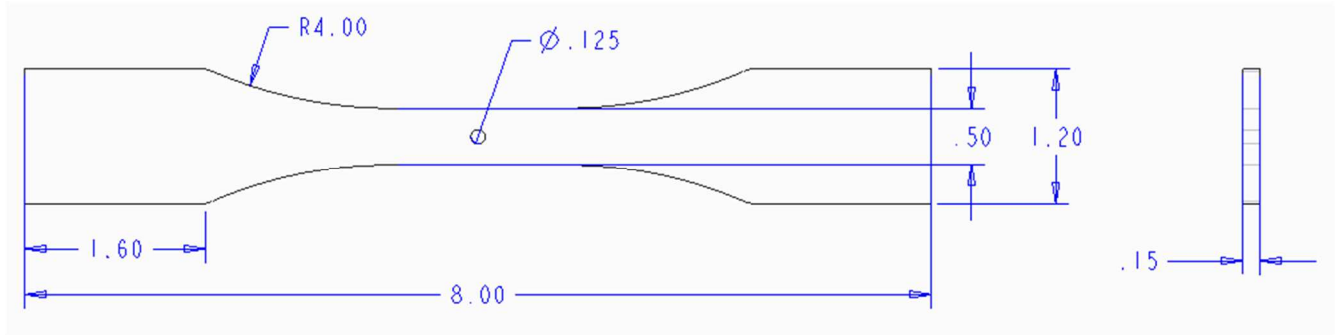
ASTM E466 Test Sample Dimensions in Inches
